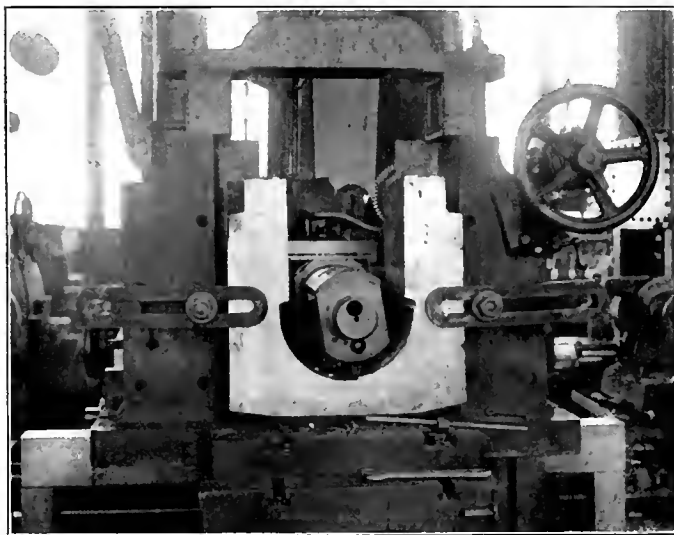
Machining the Crown of New Boxes on a Draw Cut Shaper.
